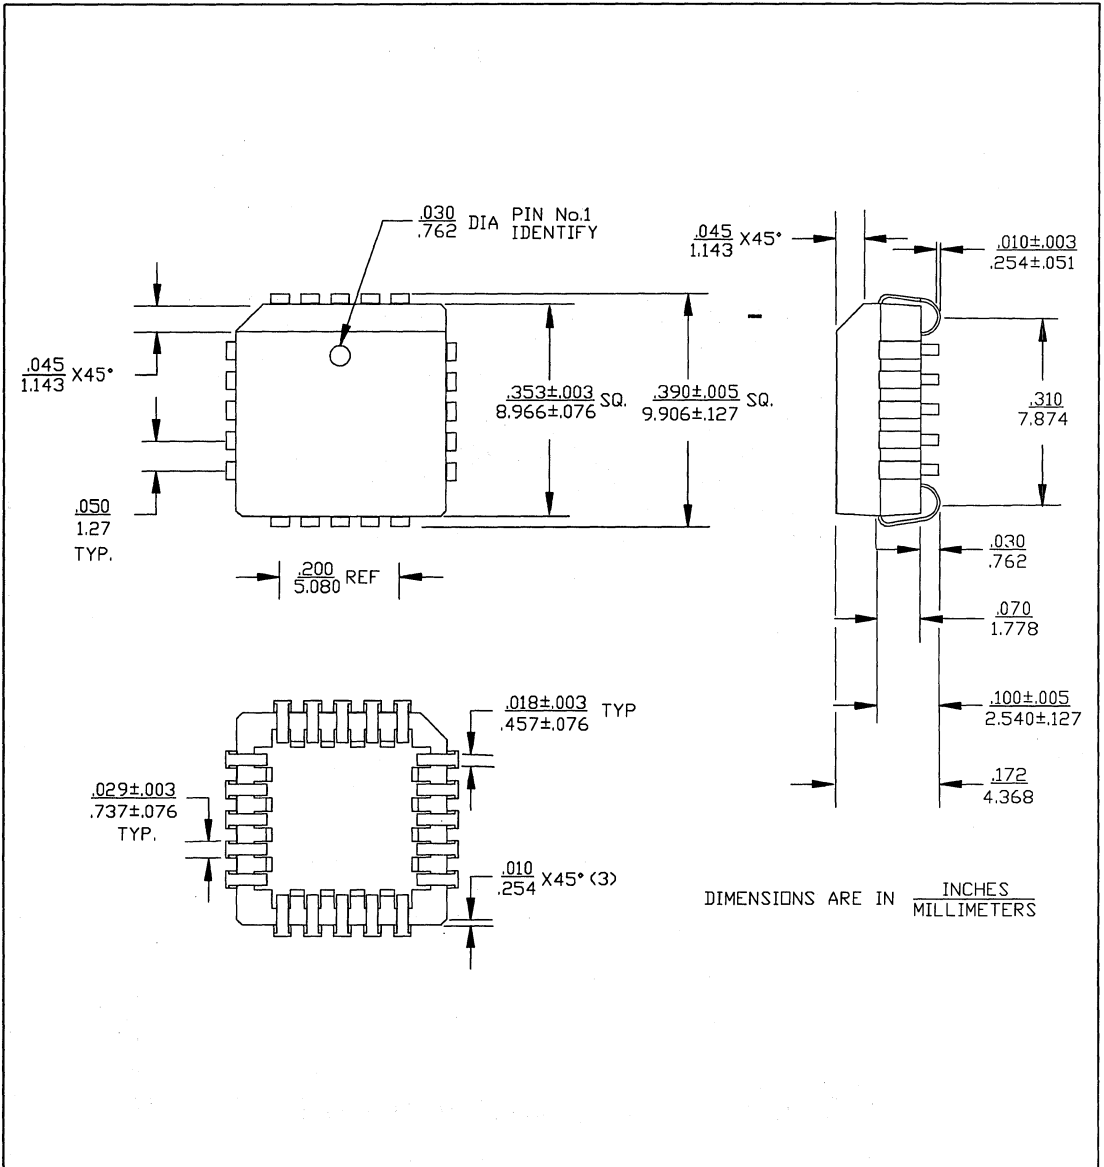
ICS90C64V 20-PIN PLCC PACKAGE DIMENSIONS
